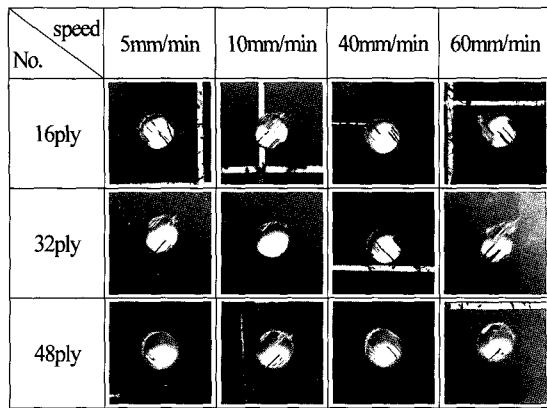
Photograph on exit side of drilled specimen (ϕ : 8mm, rpm: 800)
